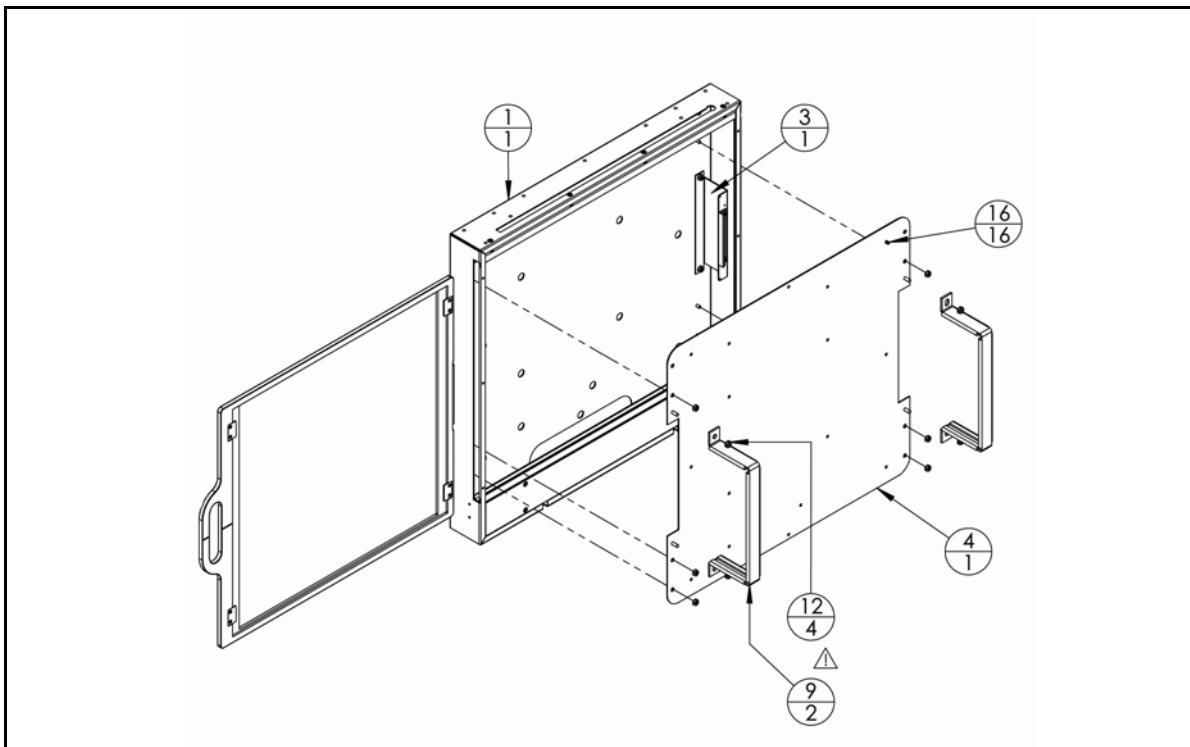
Toshiba Panel Cabinet Assembly (112-5526G1) Part B
